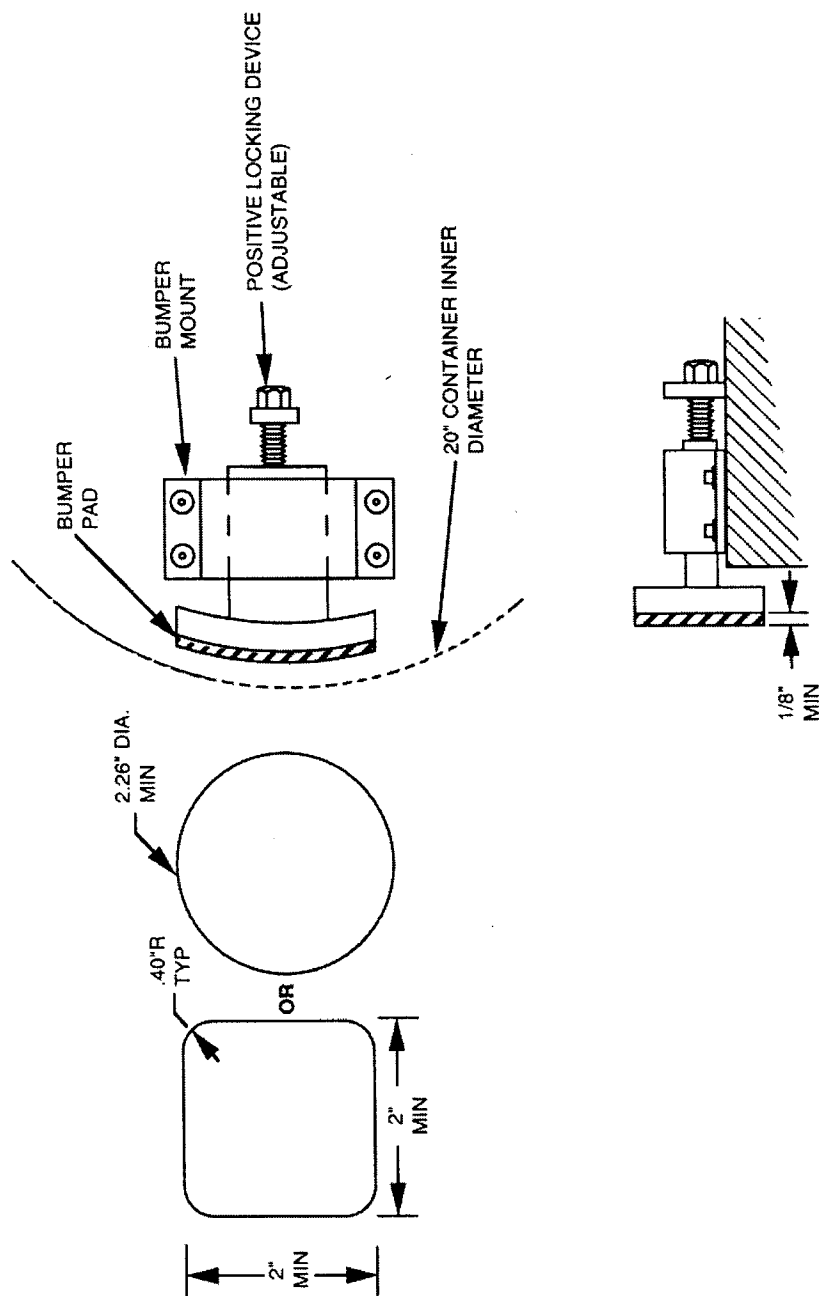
BUMPER DESIGN EXAMPLE
